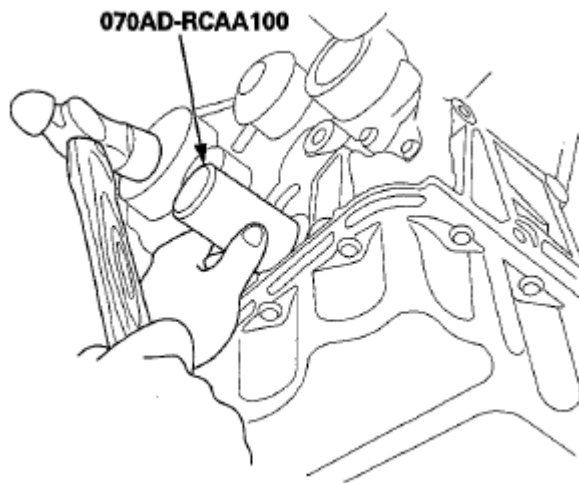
Tapping Pulley Crankshaft Oil Seal Using Oil Seal Driver
